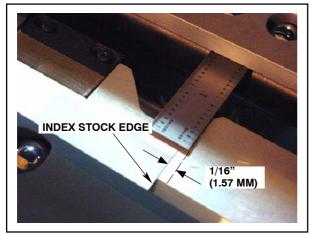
Distance Between Index Stock and Straight Edge Should Be 1/16th"
